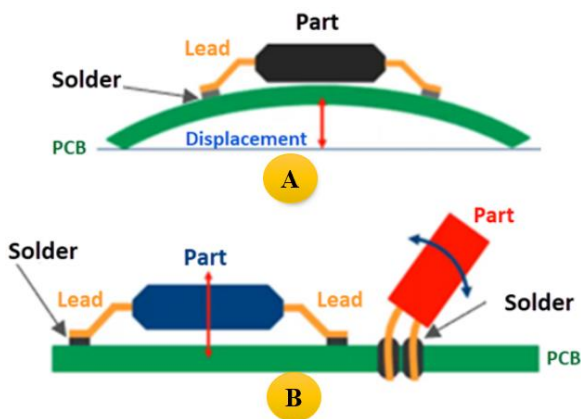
Mechanism of Fracture in Solder Joint
